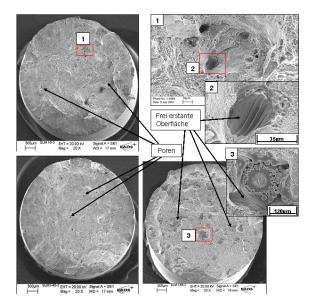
Fracture surfaces of SLM samples showing pores and zones of free surface solidification (EADS, Astrium)
